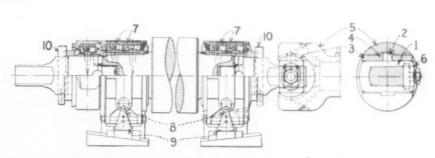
Section Showing Bearings for the Bottom Roll, the Lengthening of Old Rolls, and the Universal Coupling
